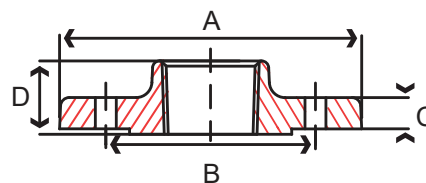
TH2 & 18TH2 – 250 lb. Threaded Companion Flange
